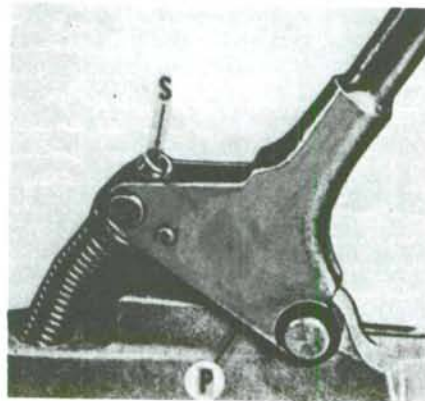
Turn screw (S) to adjust chain brake on early models. Refer to text.
